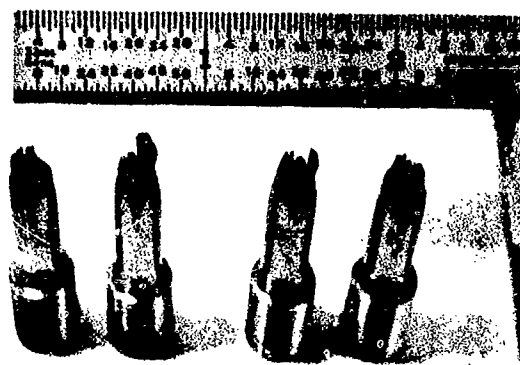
Fractured HP-9-4-25 Tensile Specimens. Right: Hoop direction, room temperature test, removed from 1.4-inch thick section. Left: Hoop direction, room temperature test, removed from 0.4-inch thick section.
